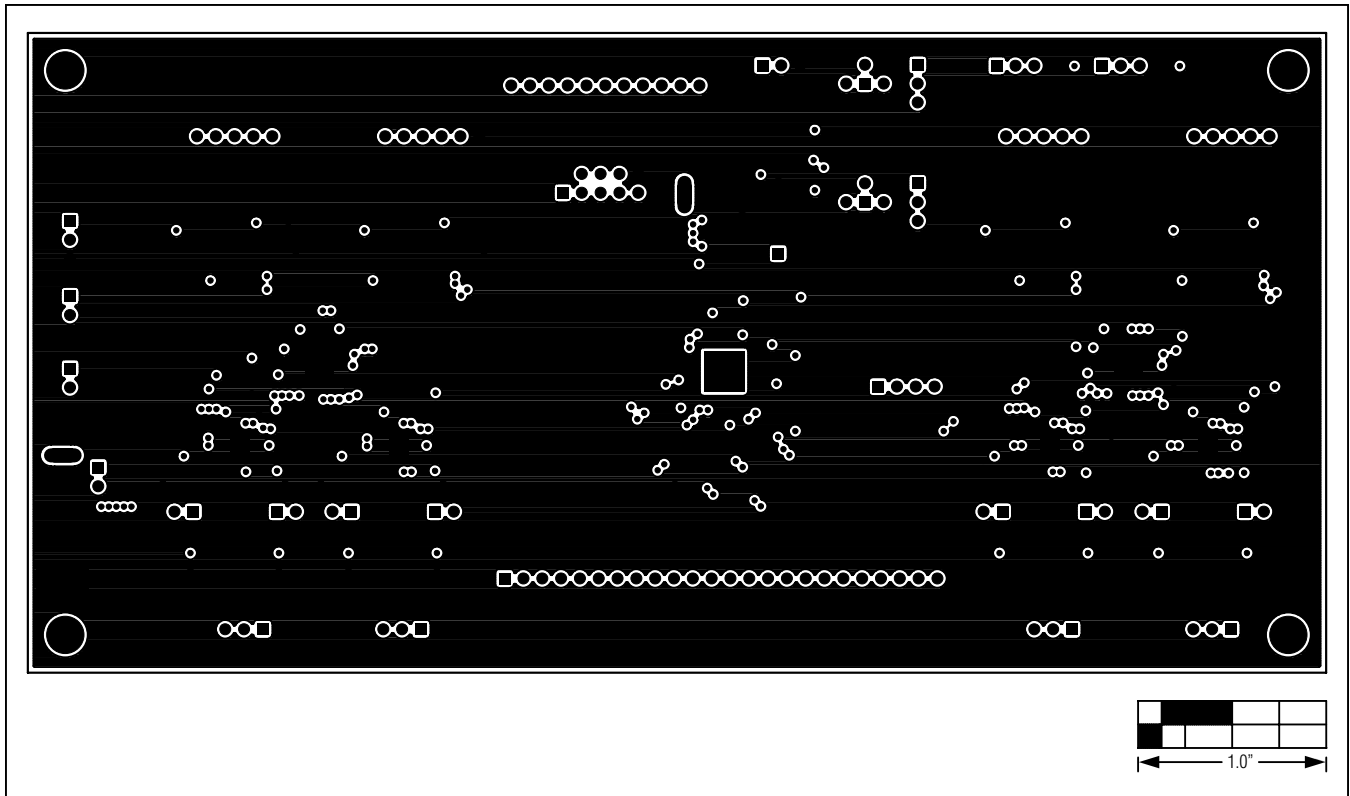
MAX14830 EV Kit PCB Layout—GND Layer 2
